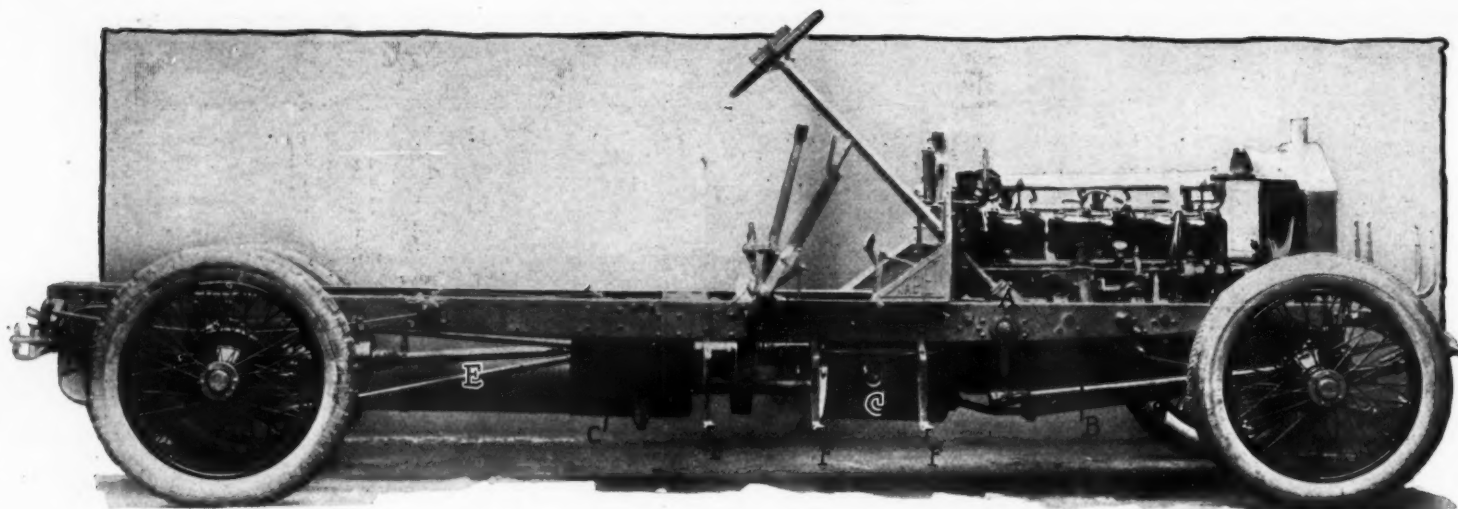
45-horsepower, six-cylinder Napier chassis. A, steering adjustment; B, reach rod; C, oil pans; F, step hangers; E, torque member
